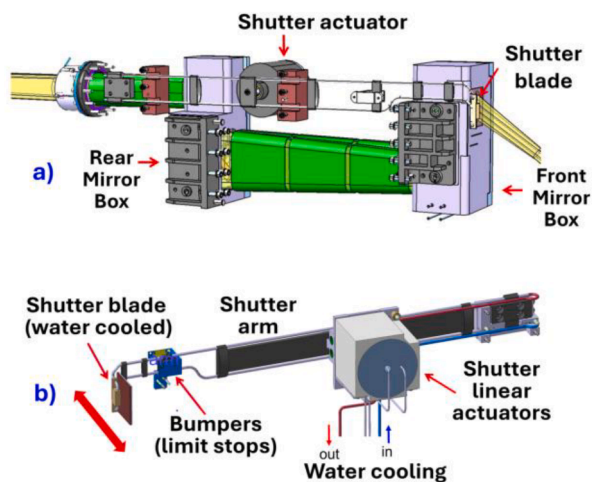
a) Layout of the boxes with attached mirrors and shutter, b) Shutter assembly.
